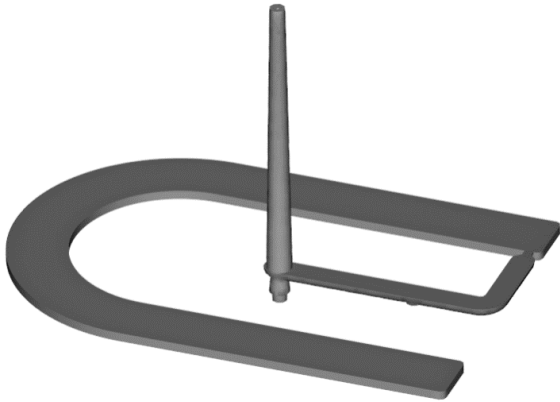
3D-view of the full length 3 mm thick part.
